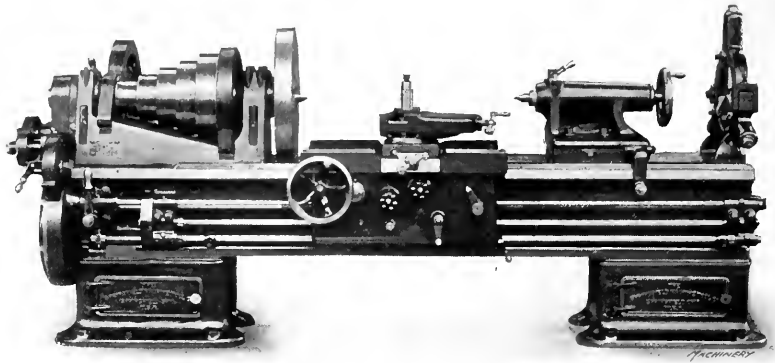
Springfield 24-inch Quick Change Gear Lathe
